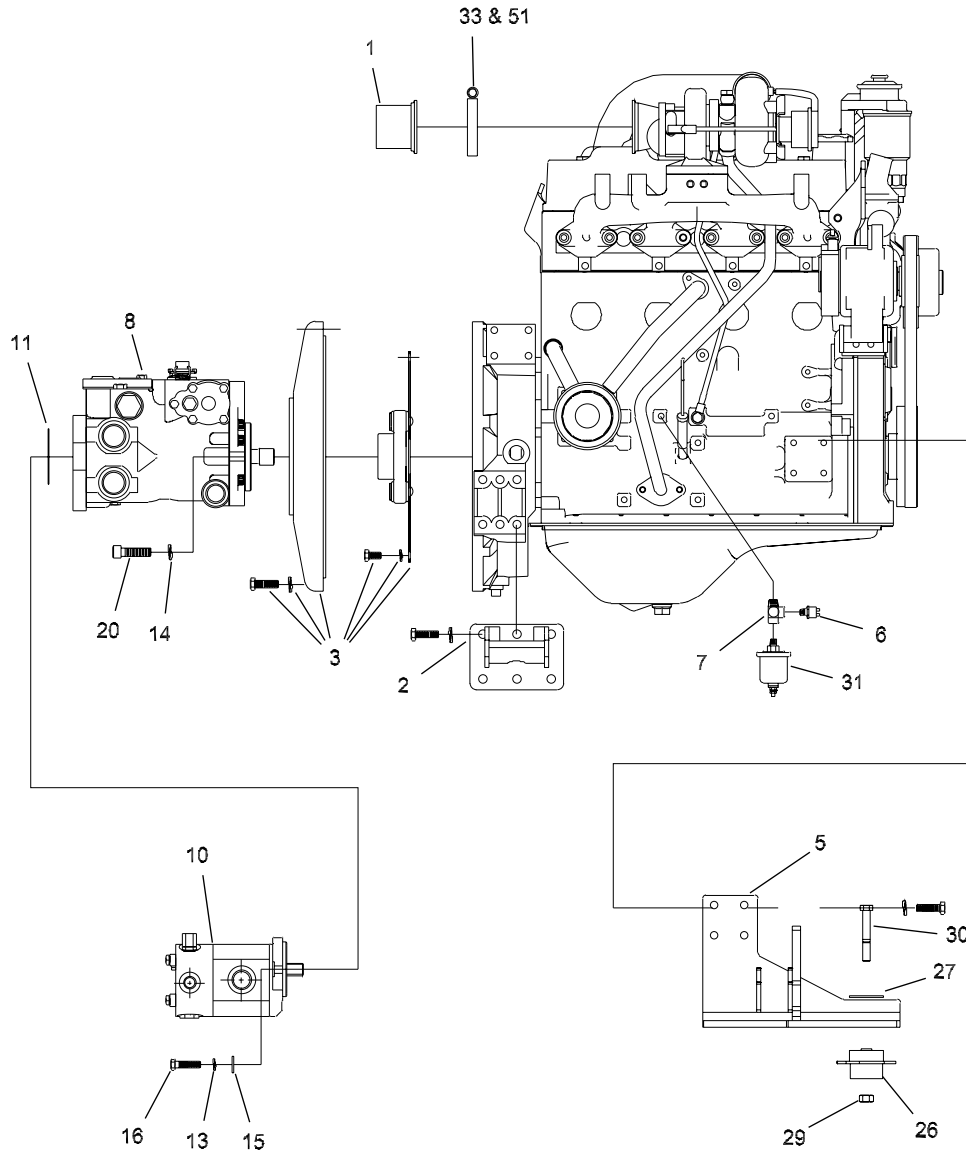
ENGINE SUBASSEMBLY, CUMMINS (SHEET 2 OF 2)
